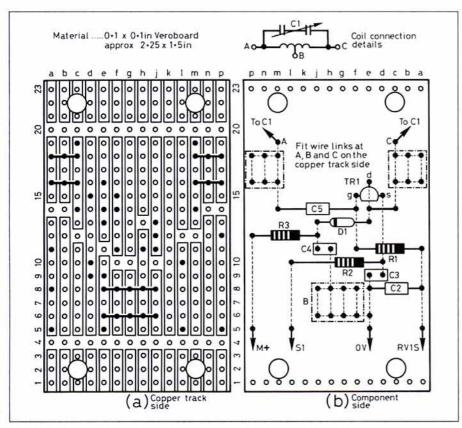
The components may be conveniently mounted on a small piece of Veroboard.
